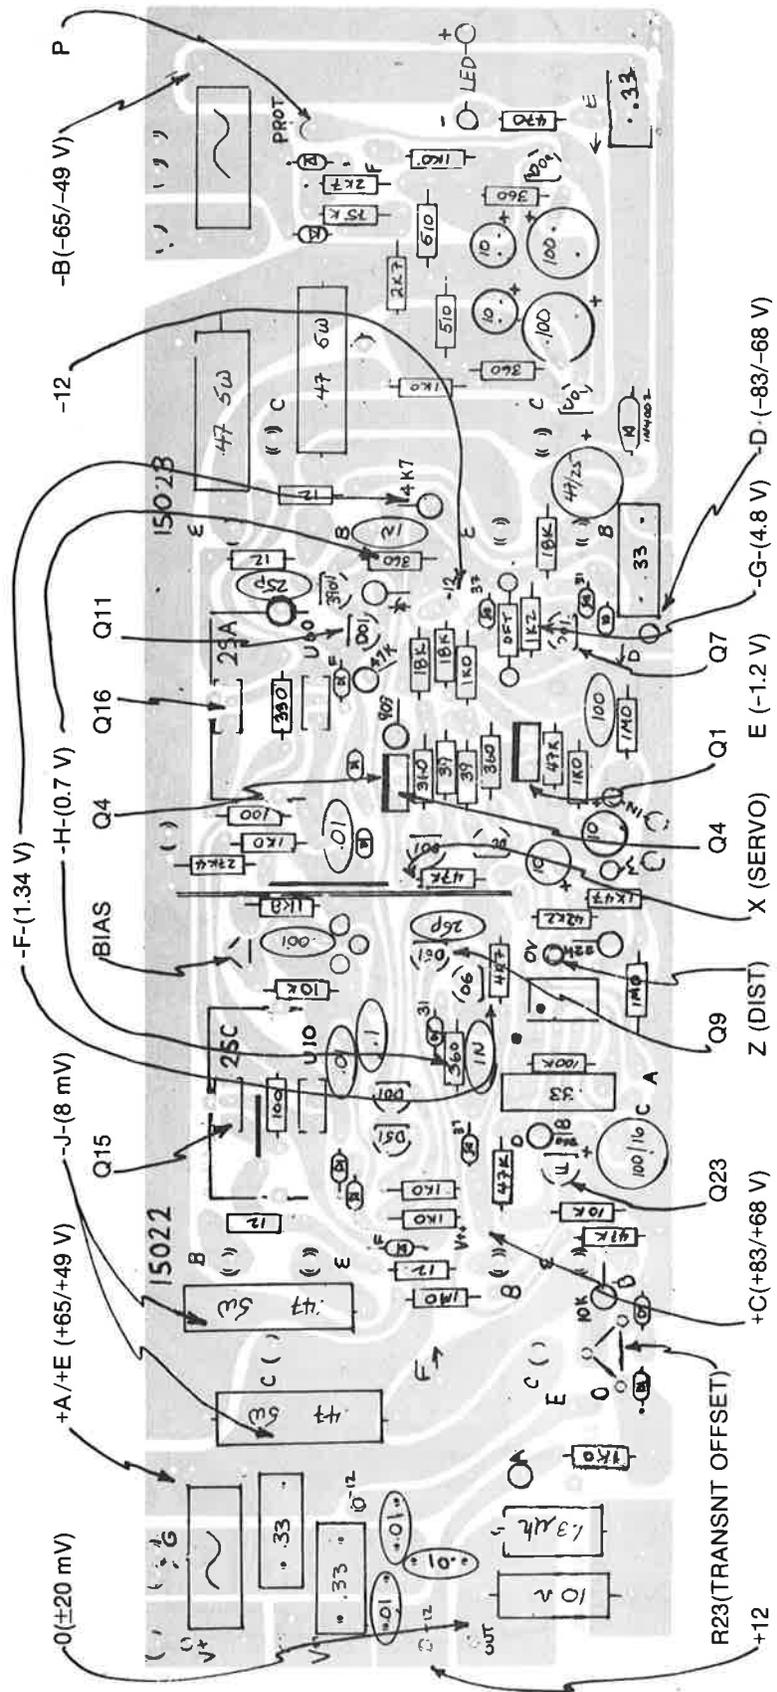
Power Amp Circuit Board, Component Side, Rev 1-2 (Early Units Only).
